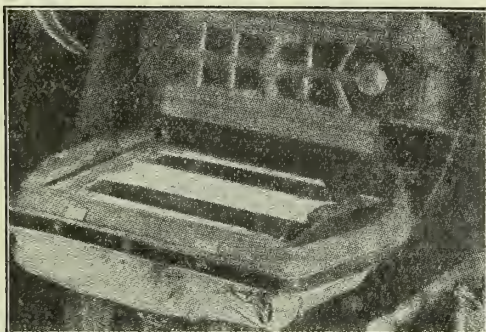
STATIONARY MOULDING MACHINE SHOWING PLATE REMOVED TO REVEAL POSITION OF STEEL-CLAD HEATER.
